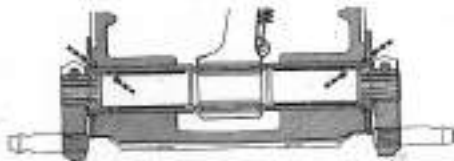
Exploded view of position of inner Pull rod connecting rod drive shaft
